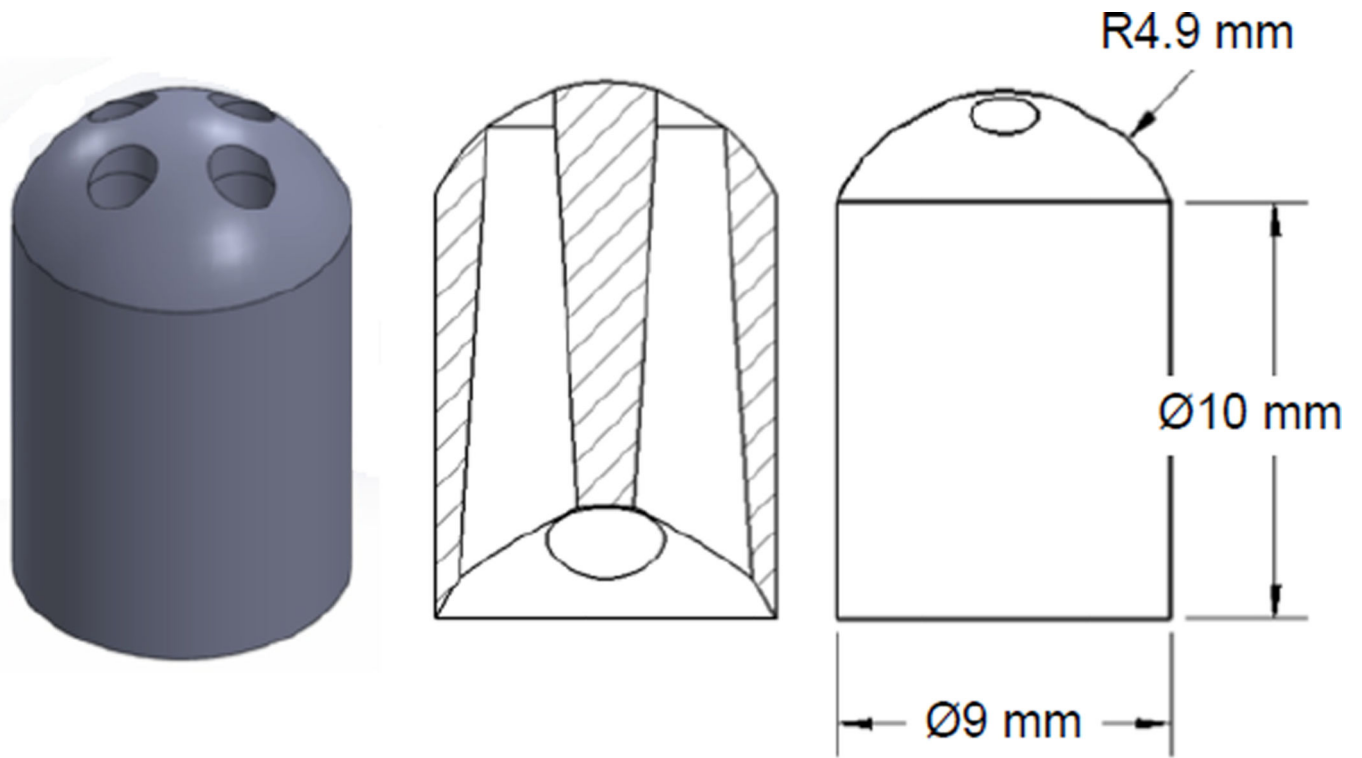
Vertebrae bead design and cross sectional view with dimensions.
